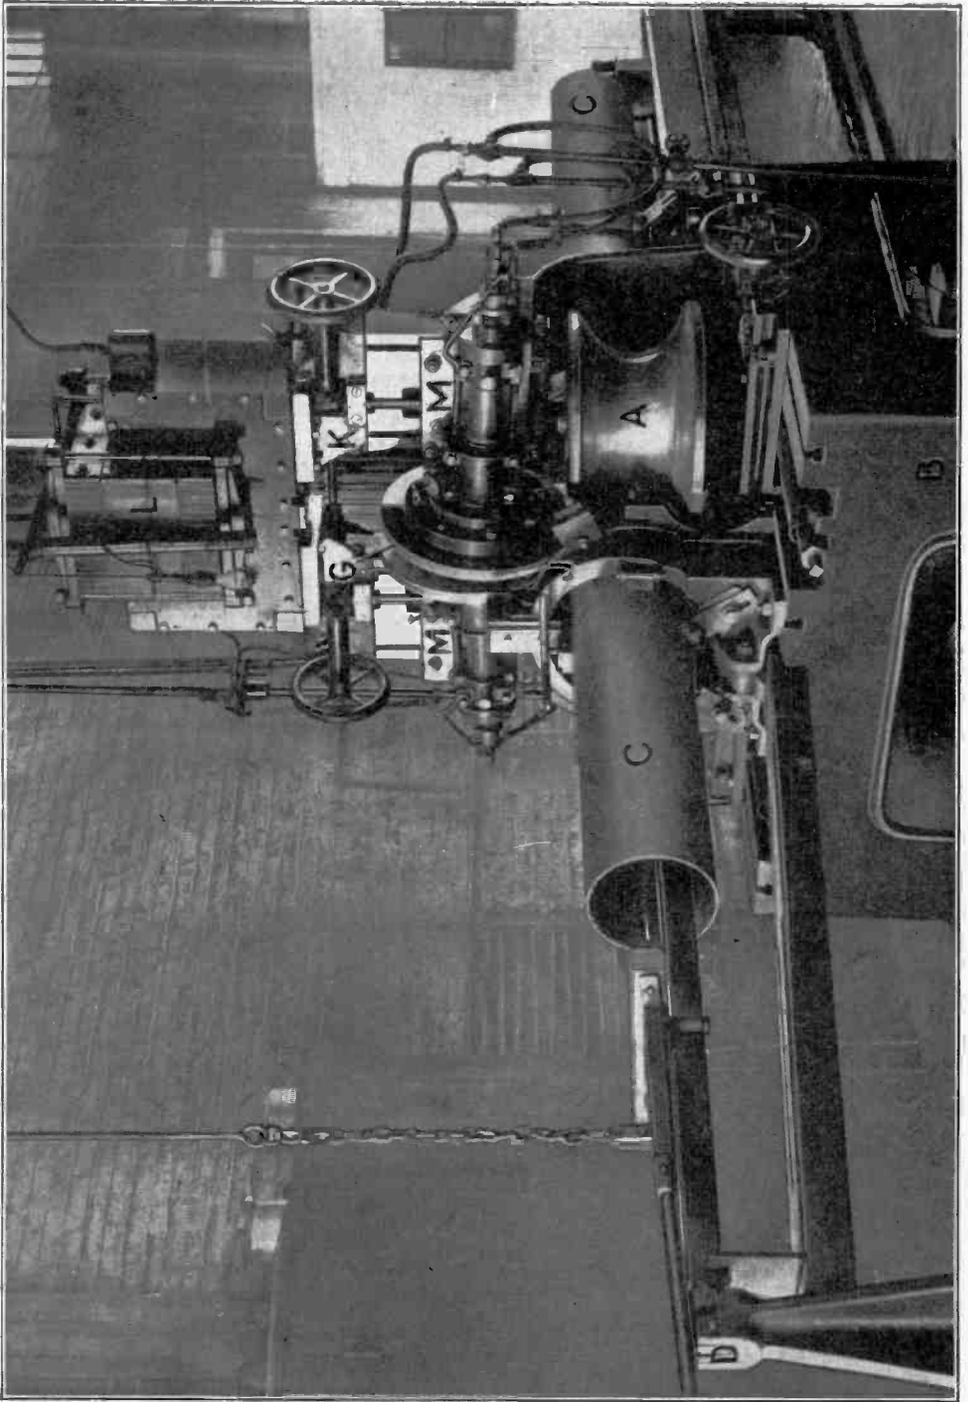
Electric-Welding Machine with a Shell in Starting Position and One at Finished Position.
